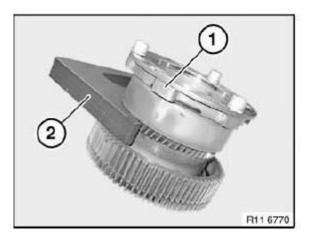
Identifying VANOS Gear And Special Tool Courtesy of BMW OF NORTH AMERICA, INC.
